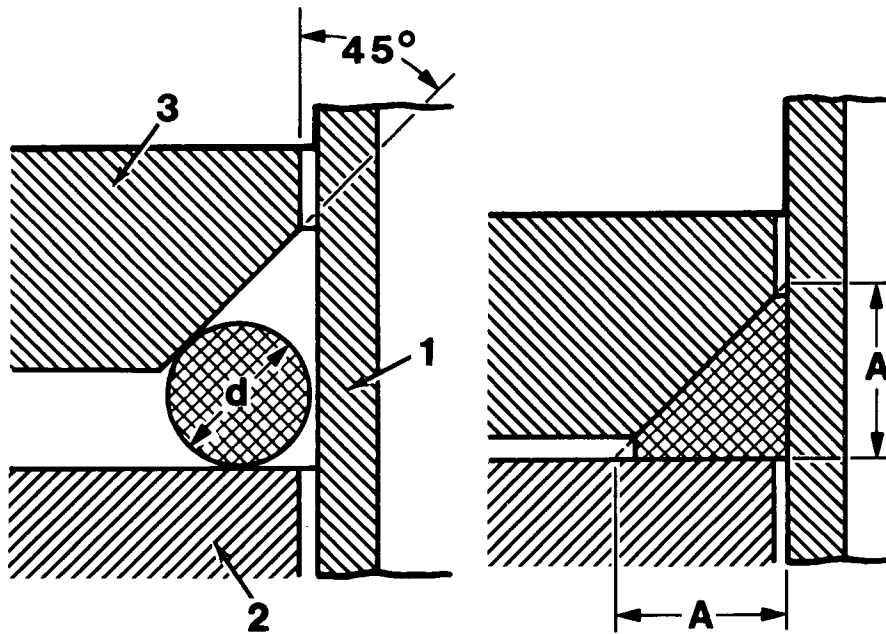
Conical Flange O-Ring Seal (Ref. 3.4-2).
